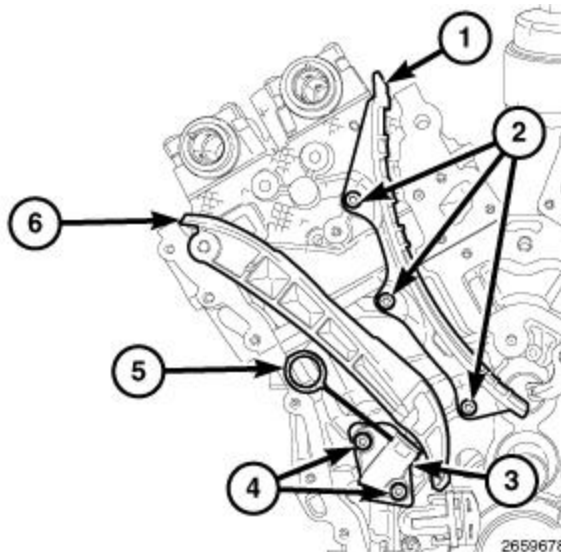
Right Cam Chain Tensioner, Arm, Guide & Bolts
